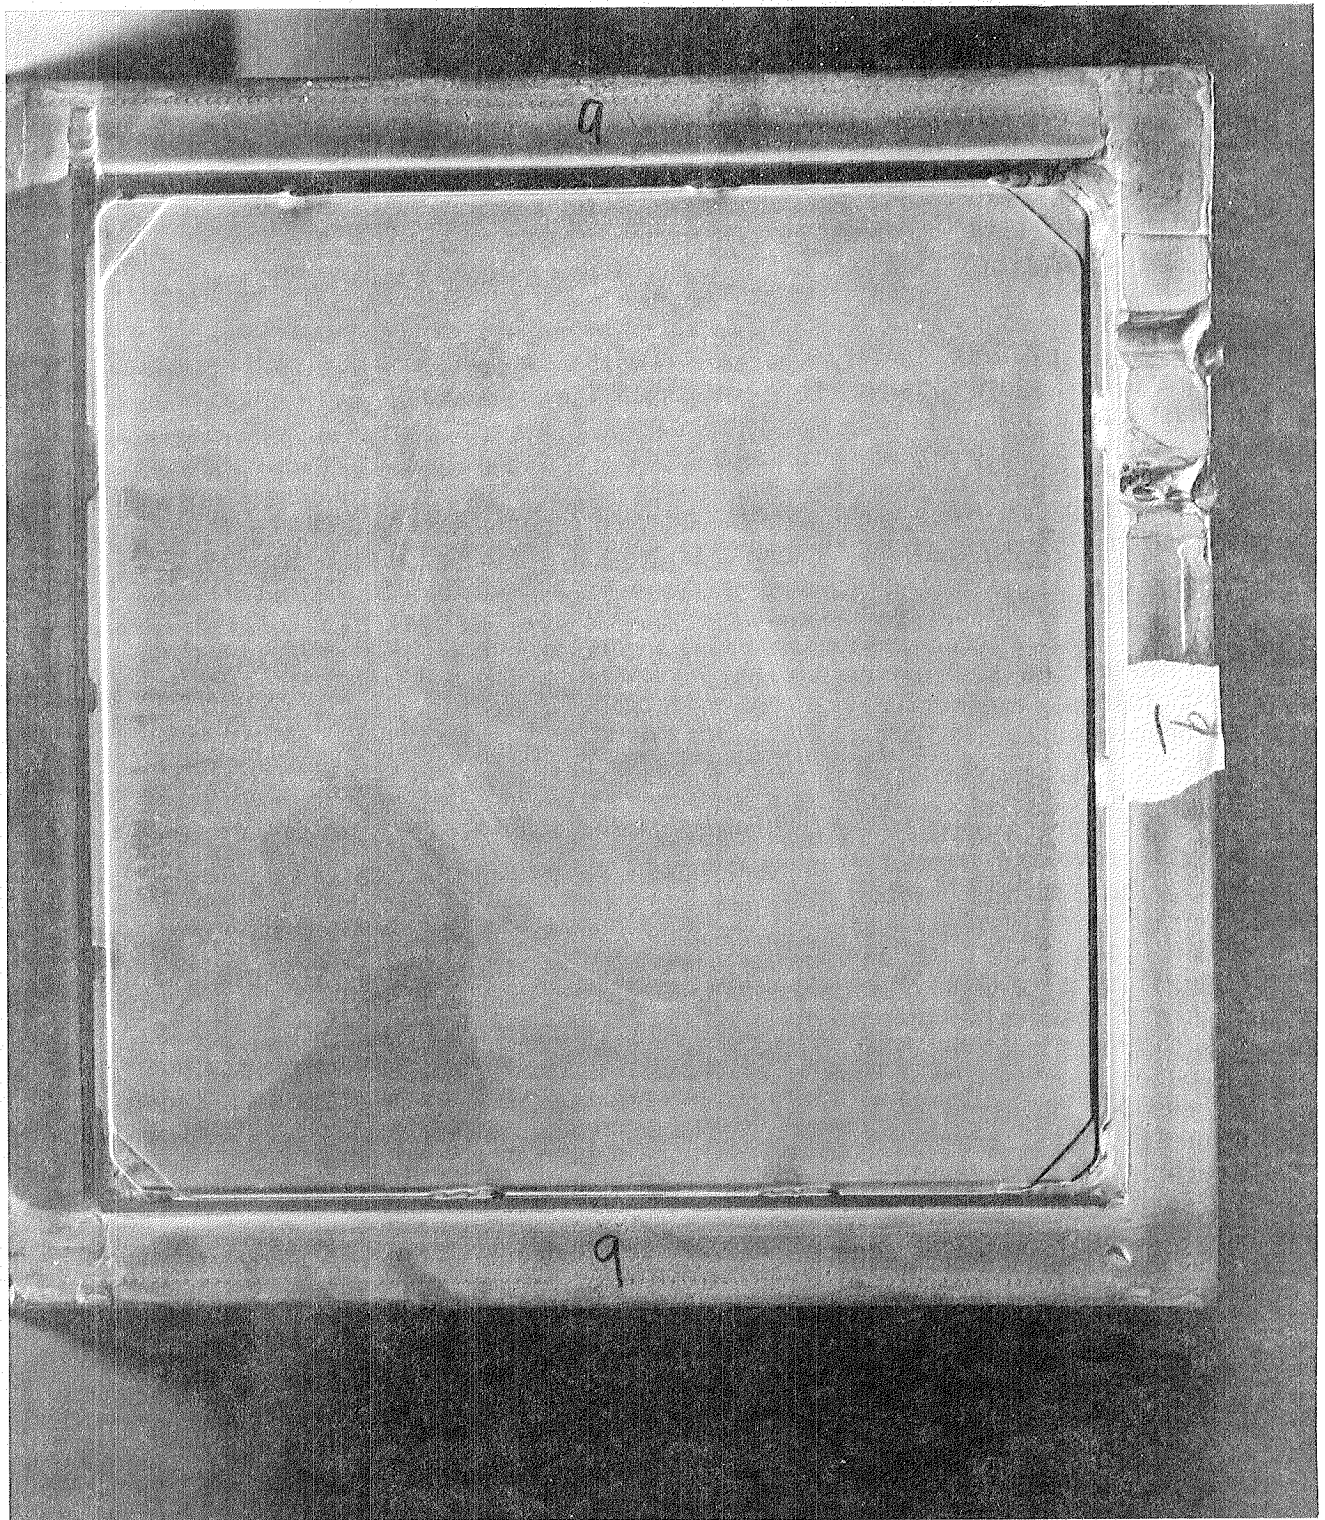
PANEL NO. 9 BOTTOM FACE SHEET
